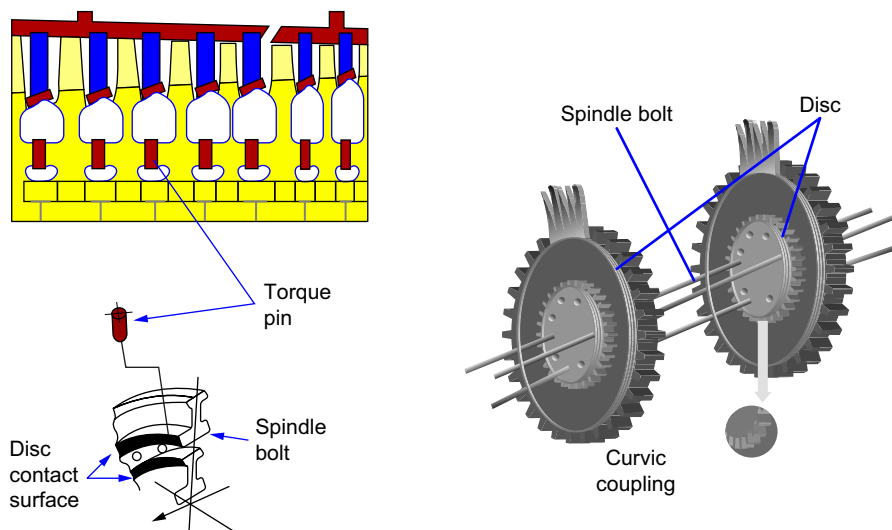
Assembly mechanism of turbine disks using a curvic coupling.
